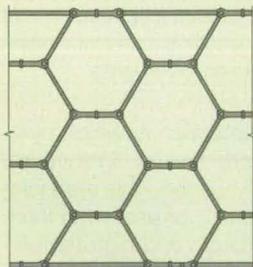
A Network of Joints and Legs according to the design shown in Figure 2 would constitute a rigid but collapsible structure.
